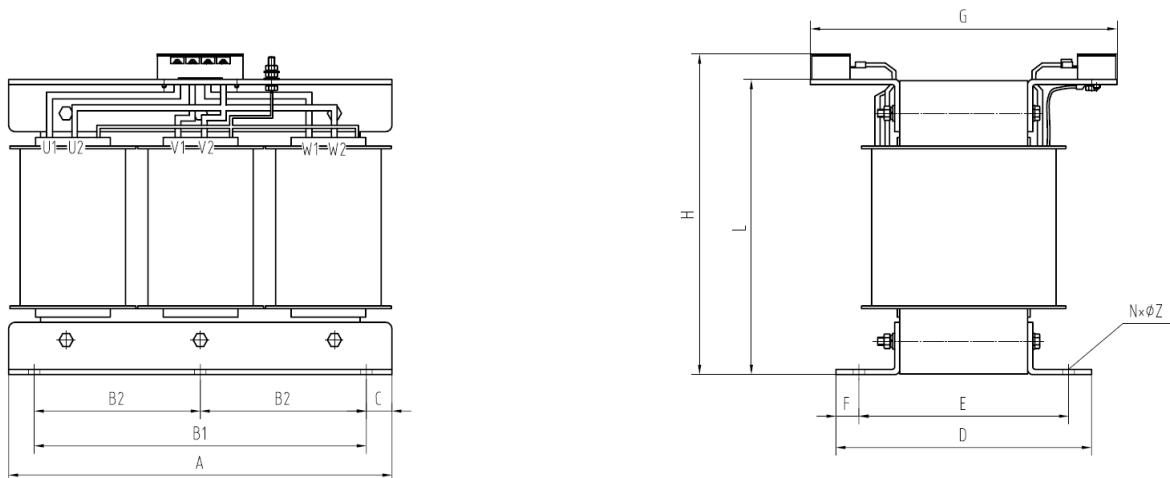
Appearance dimension of BS three-phase insulation transformer
